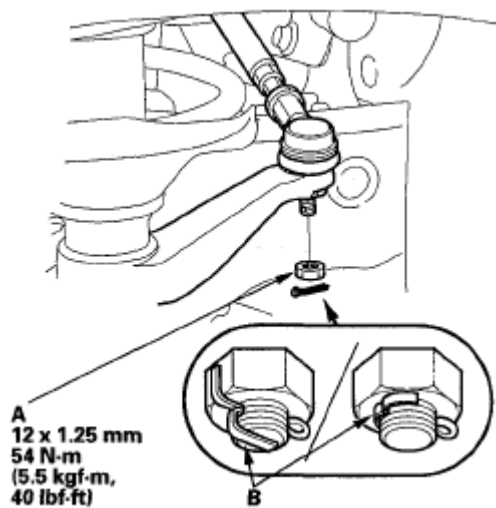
Identifying Tie-Rod Nut With Torque Specification
